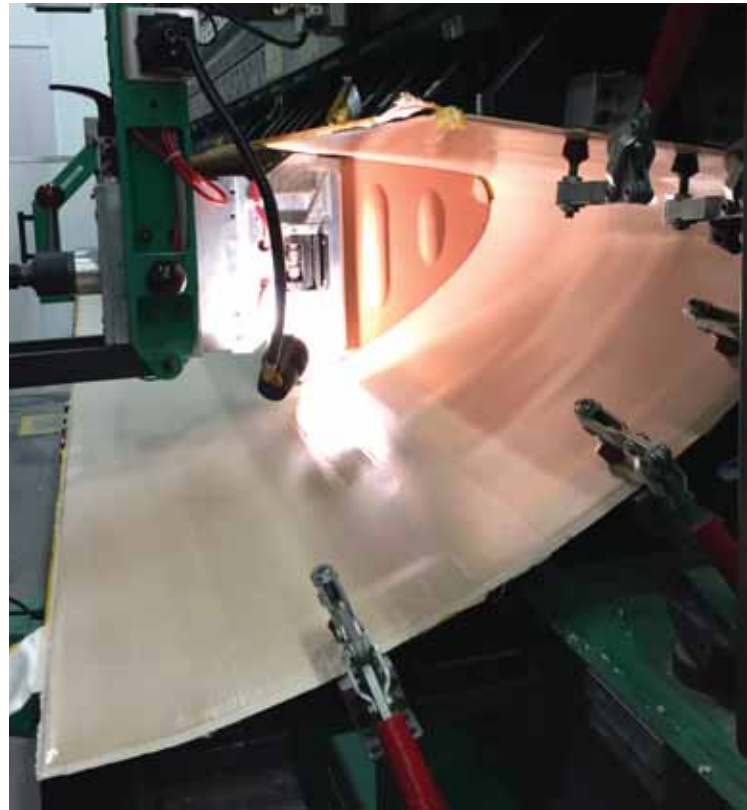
Welding's future: Toward "lights out" technology
